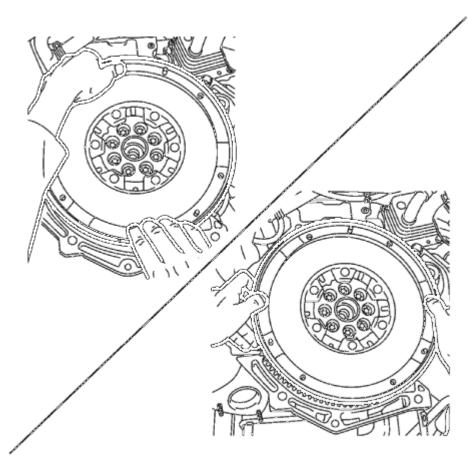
Inspecting Tilt Clearance Courtesy of GENERAL MOTORS COMPANY
